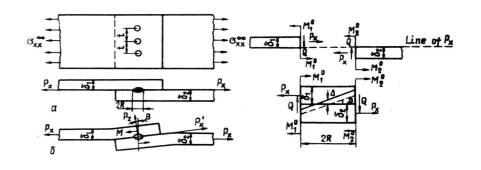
Scheme of welded joint with a single-row spot weld
